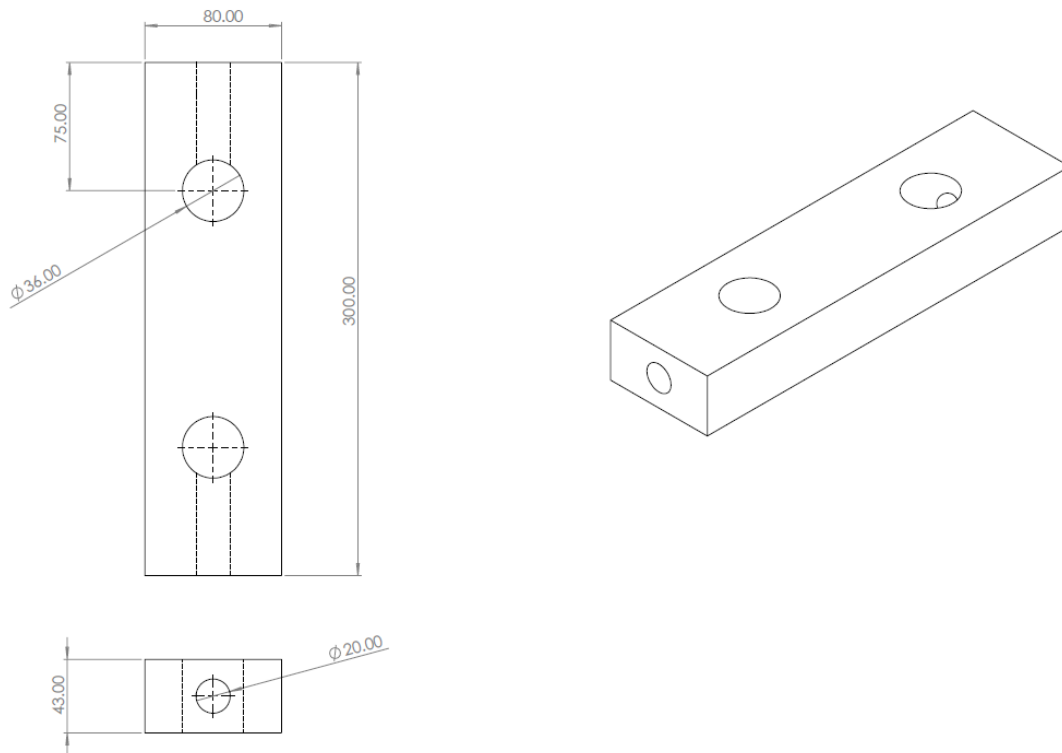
CAD drawing of T-bolt specimens (dimensions in millimeters)
